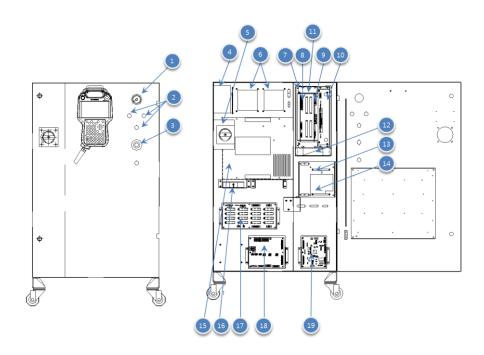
Part arrangement in the interior of the front surface of the Hi5a-P10/P20 controller
